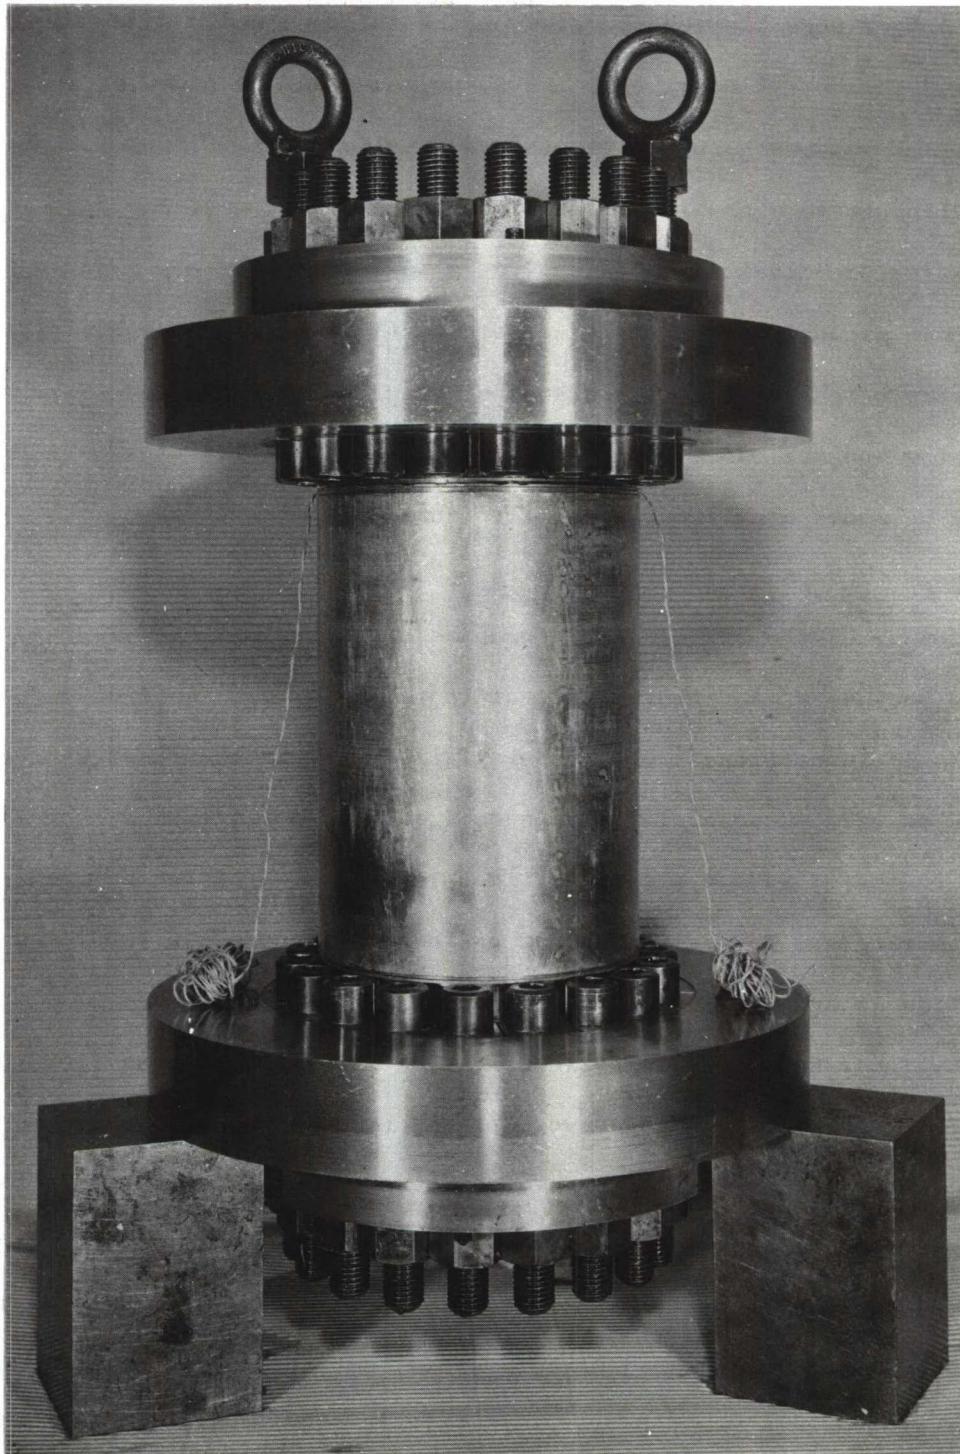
Fixtured Cylinder Ready for Pre-Straining.
